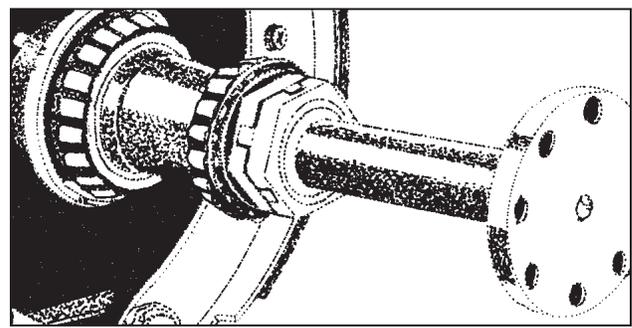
Bearing mounting and adjustment nuts of full floating construction.
